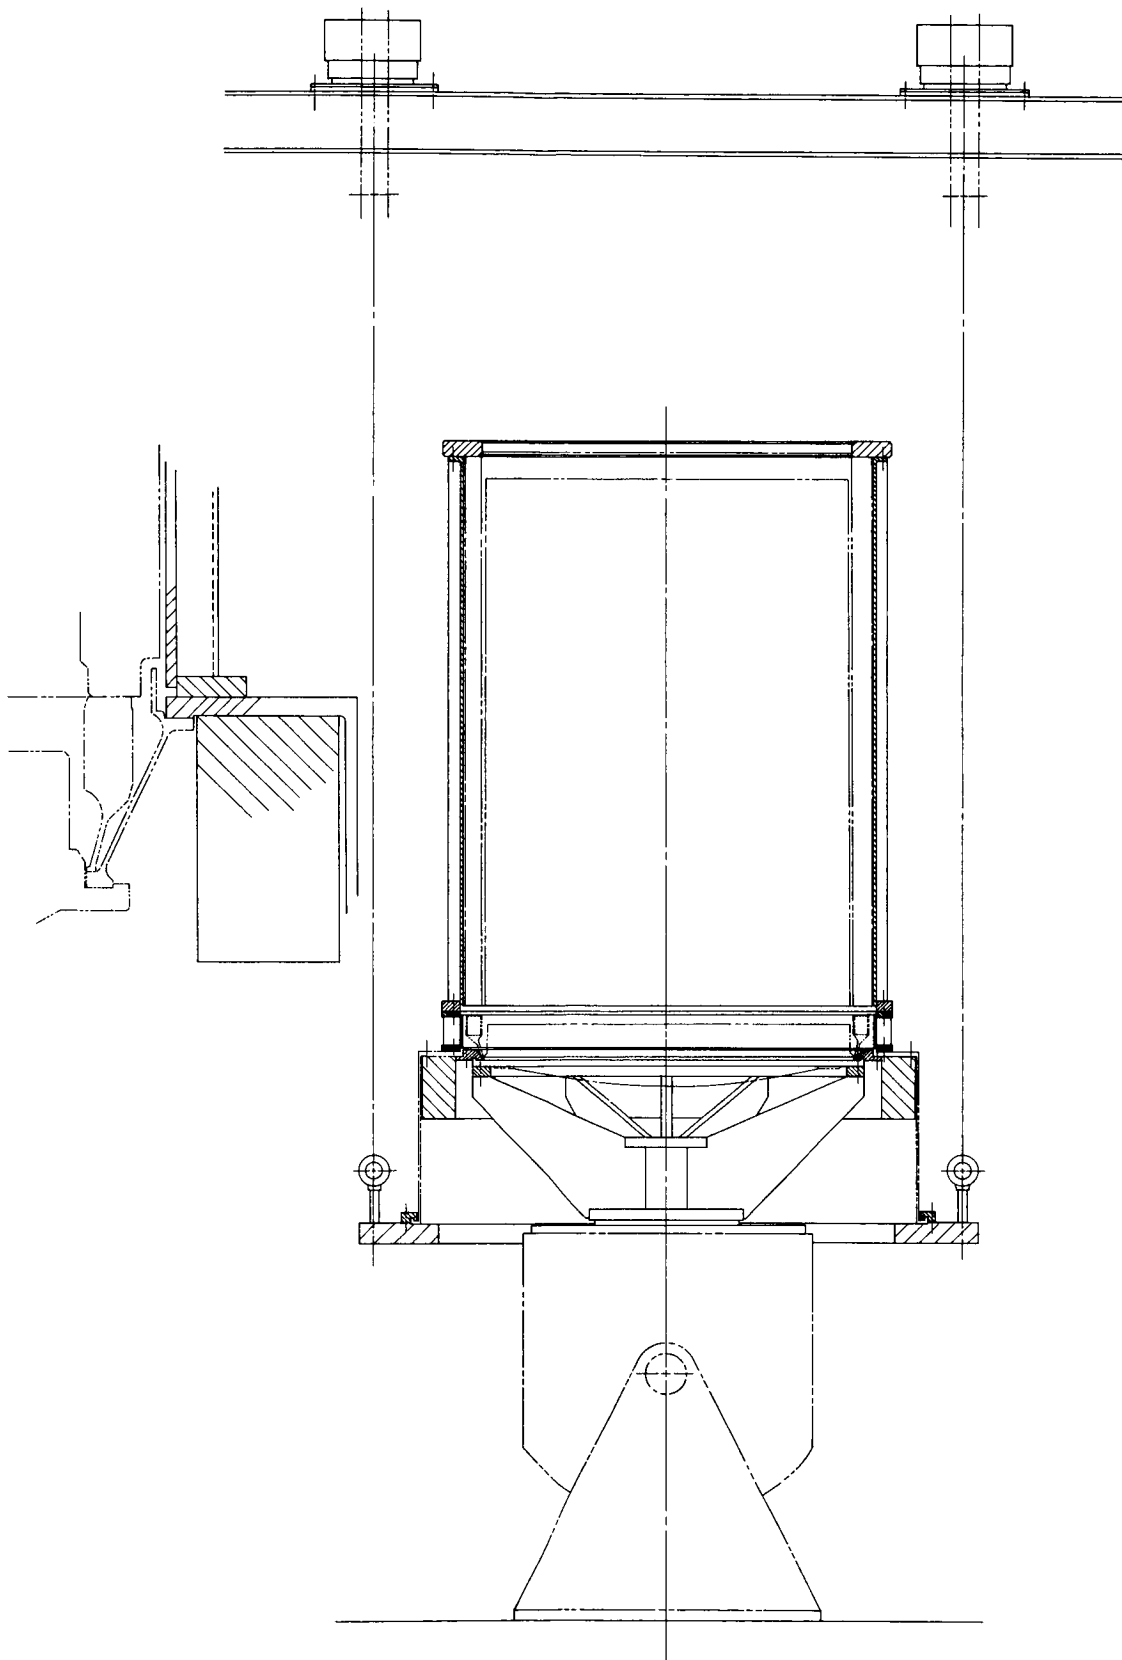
Reactor Assembly ND 201 Axial Vibration Test
